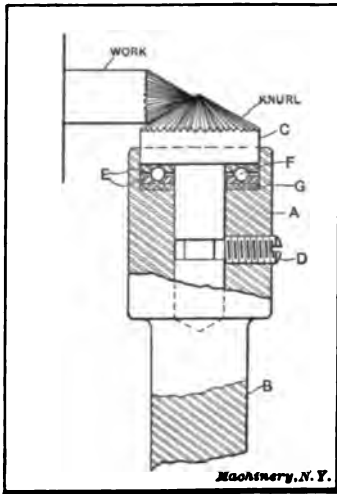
Bevel Knurl-holder used on the Cross-slide
